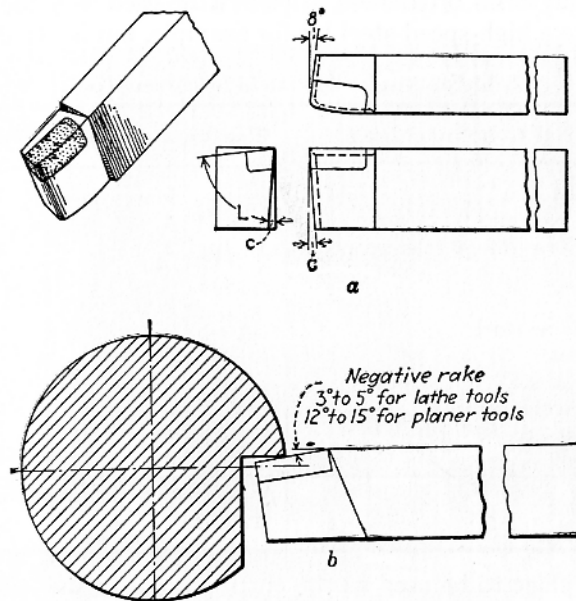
Cemented carbide-tipped tools. (a) Turning tool, angles marked c are clearance angles and L is the lip angle; (b) shows how an interrupted cut in lathe work (or the beginning of a cut in a shaper or planer) strikes the tool having negative rake; the impact is some distance behind the nose and is less likely to break the tip.
